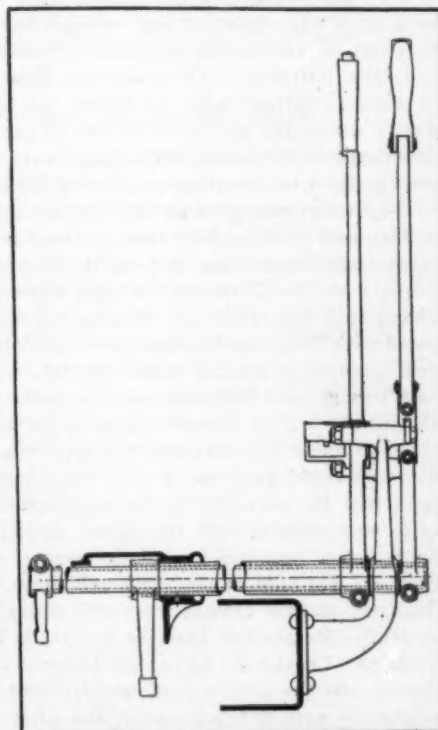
Part section of the side levers and mechanism, showing a concentric relation of the sliding gear shaft to the brake shaft
